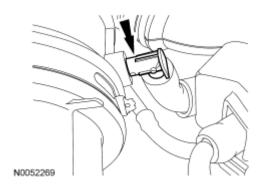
Identifying Wiring Harness Retainer From RH Valve Cover Stud Bolt Courtesy of FORD MOTOR CO.
